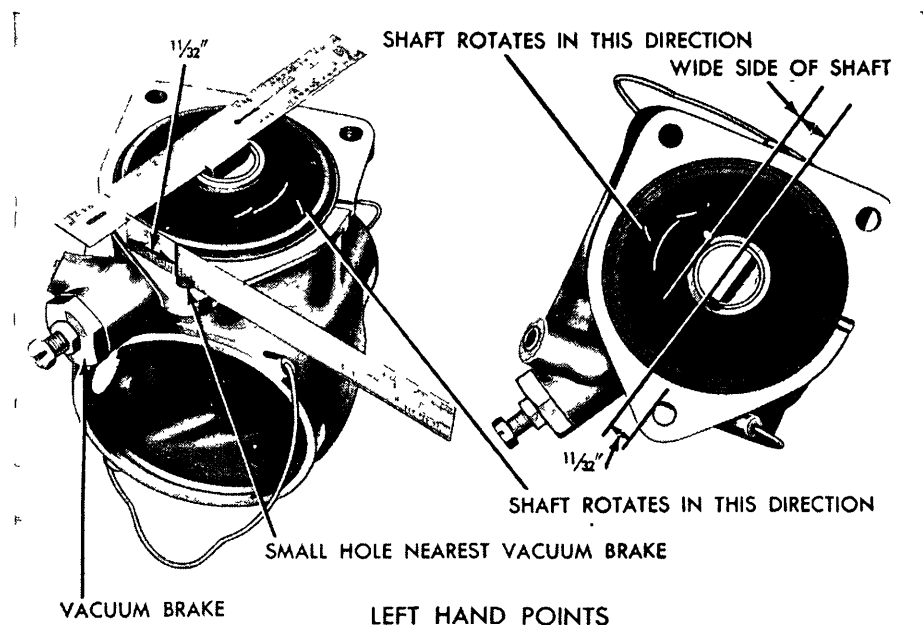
Timing distributor on Lincoln cars having vacuum brake type distributors when distributor fixture is not available. For right-hand points →
